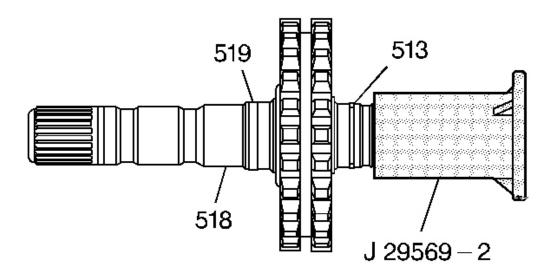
Sizing Turbine Shaft Oil Seal Rings With J 29569-2 Courtesy of GENERAL MOTORS CORP.
